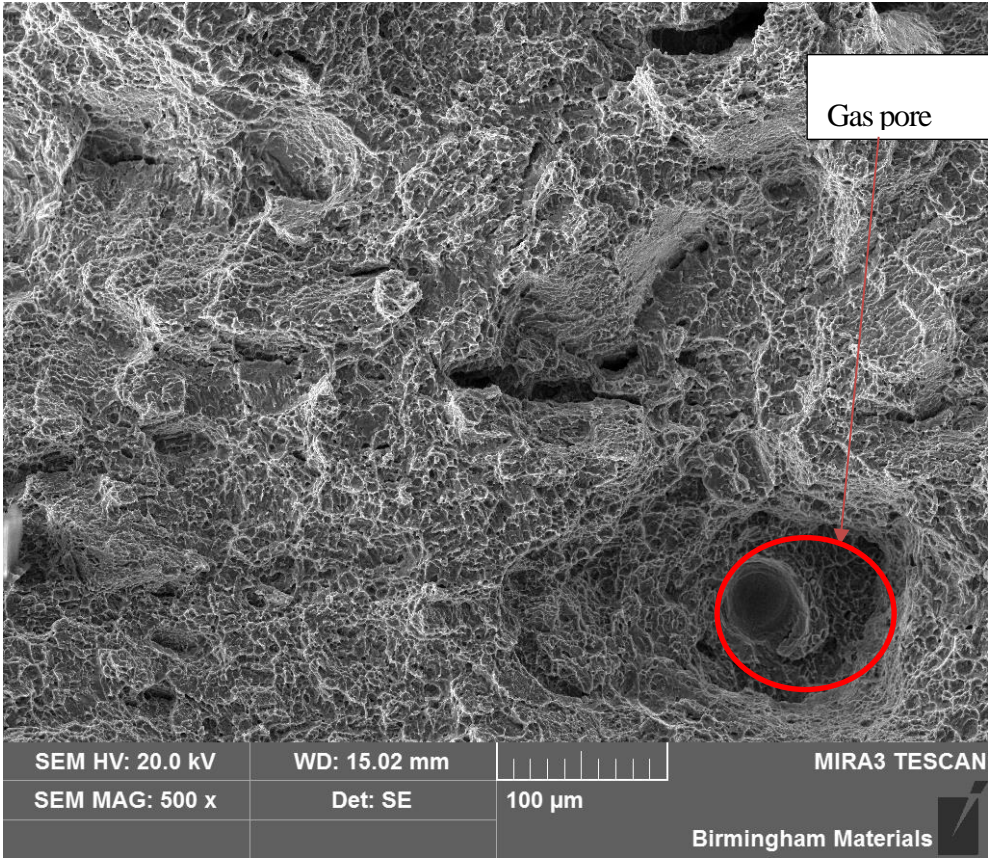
EIGA as-built fracture specimens indicating gas pores.
